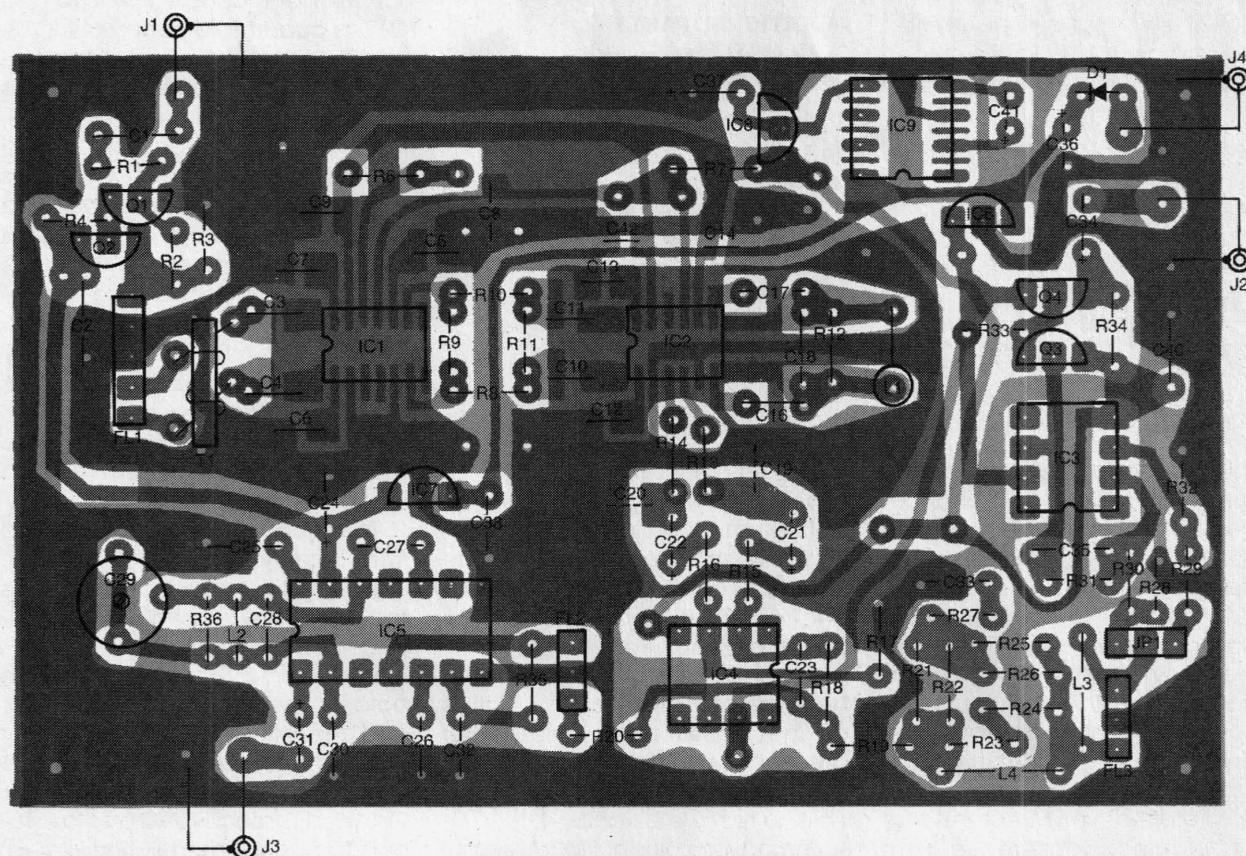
The IF70 makes use of more surface-mounted components. Be careful not to cause a solder bridge when soldering IC1 or IC2 to the board—you might have to remove the chip completely in order to clear the traces underneath the component of excess solder.
